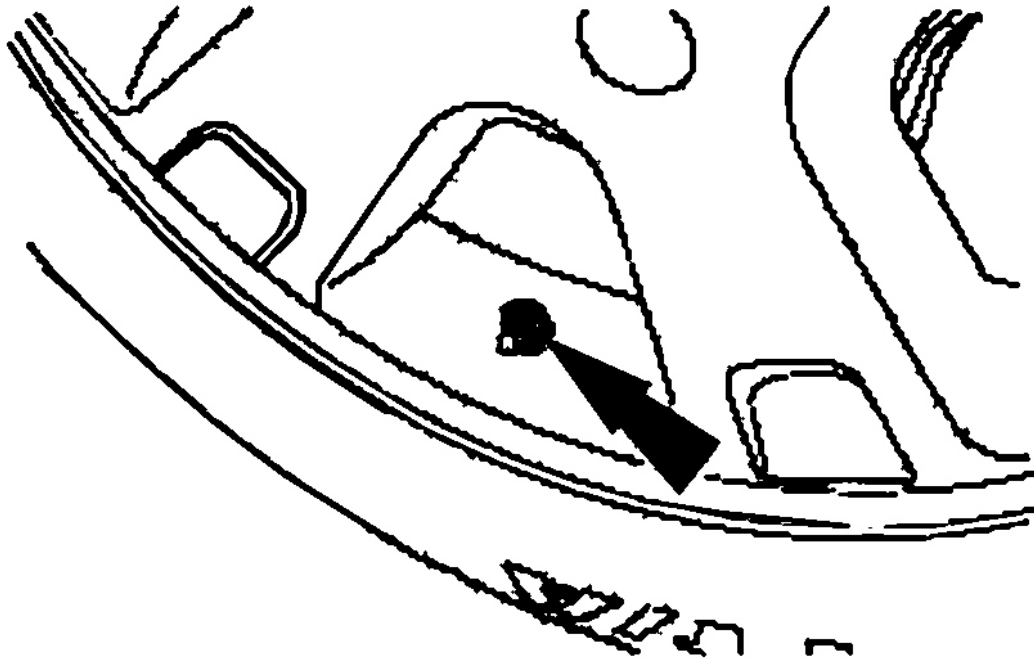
Identifying Parts Of Tire Pressure Monitoring Sensor Assembly
